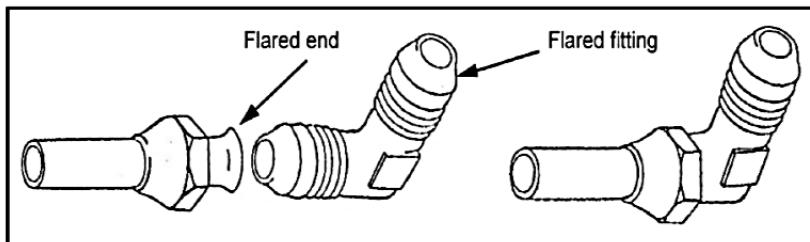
Flaring and Flanging Flexible Copper Tubing.
